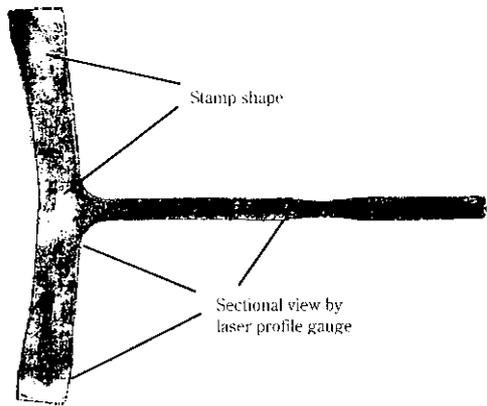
Comparison of sectional view obtained by the laser profile gauge with that by stamp shape
